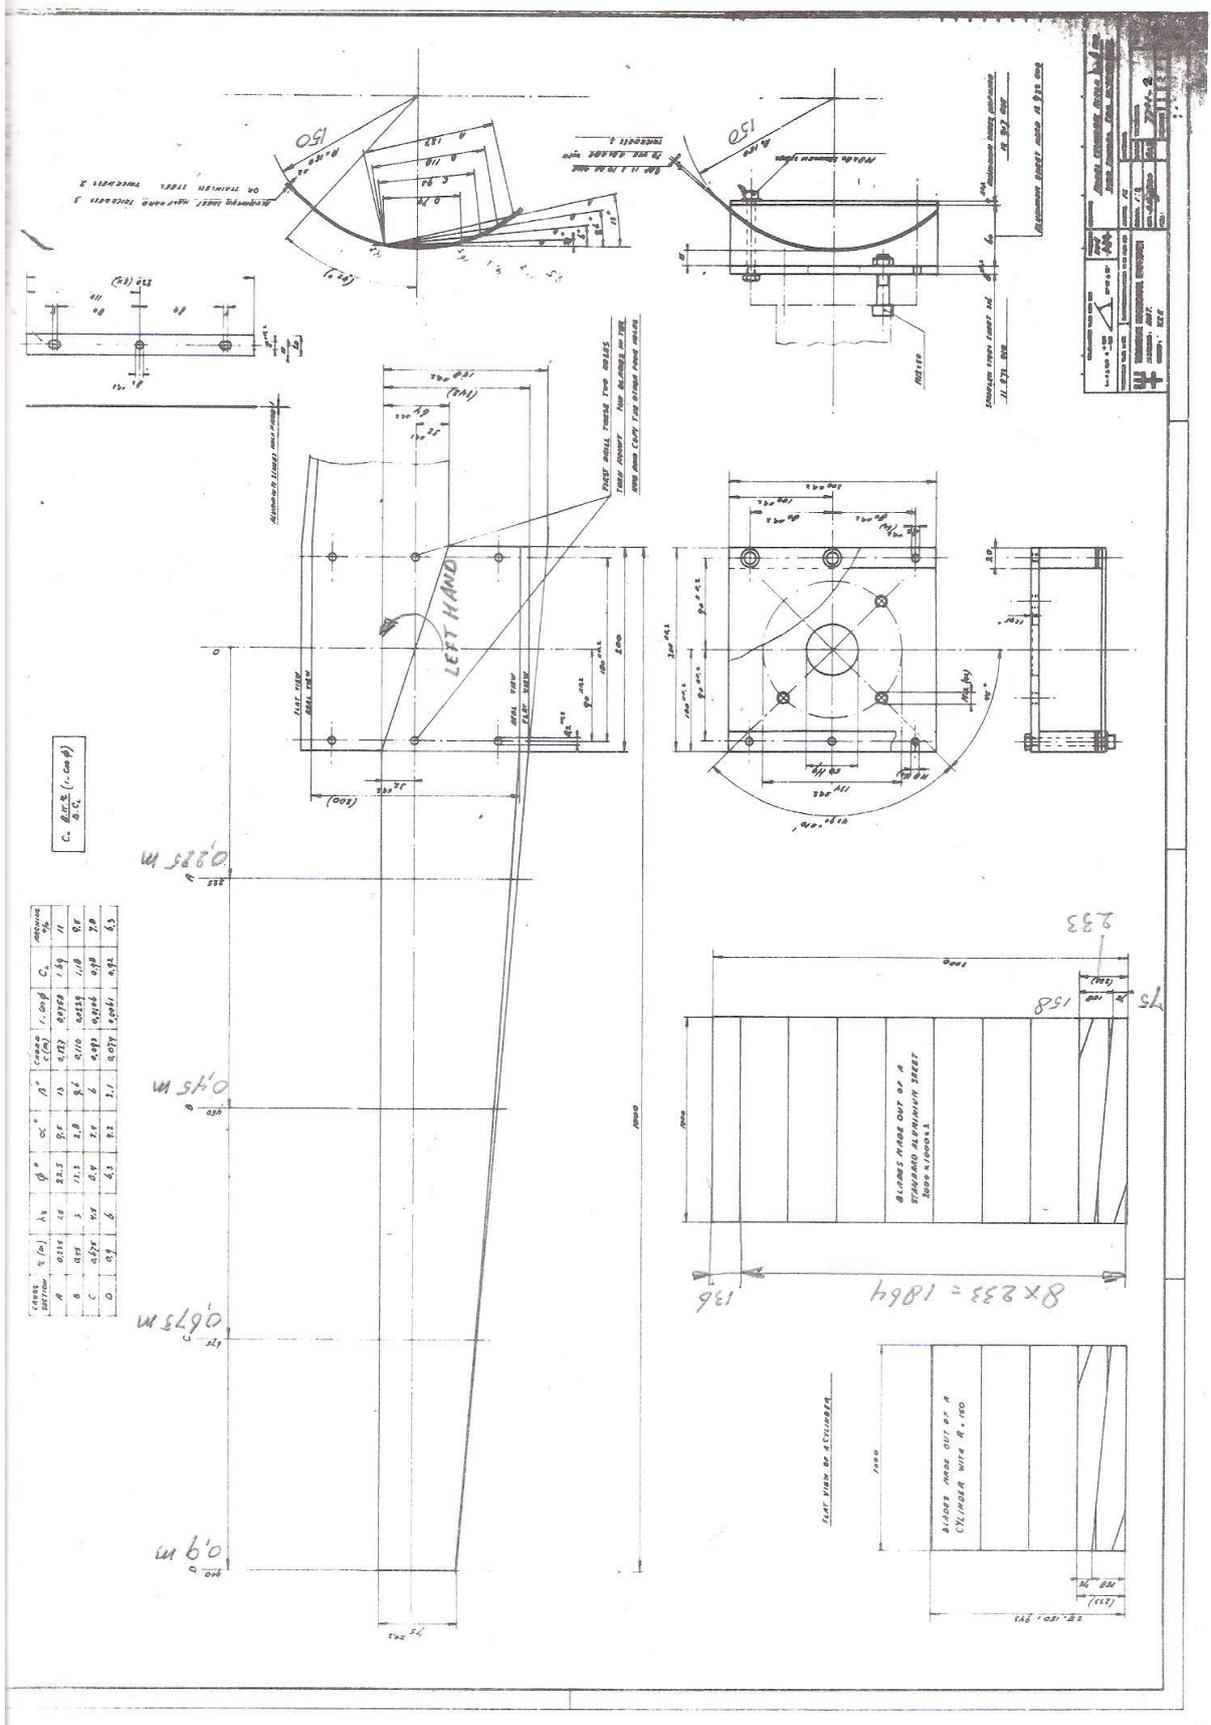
Drawing of 2-bladed rotor with $\lambda_d = 6$ and $R = 0.9$ m
